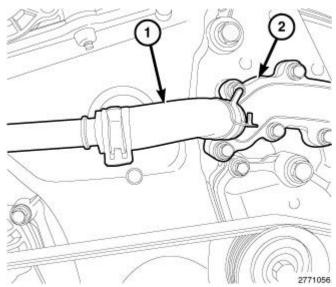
Heater Core Supply Hose & Coolant Outlet Housing Courtesy of CHRYSLER GROUP, LLC
